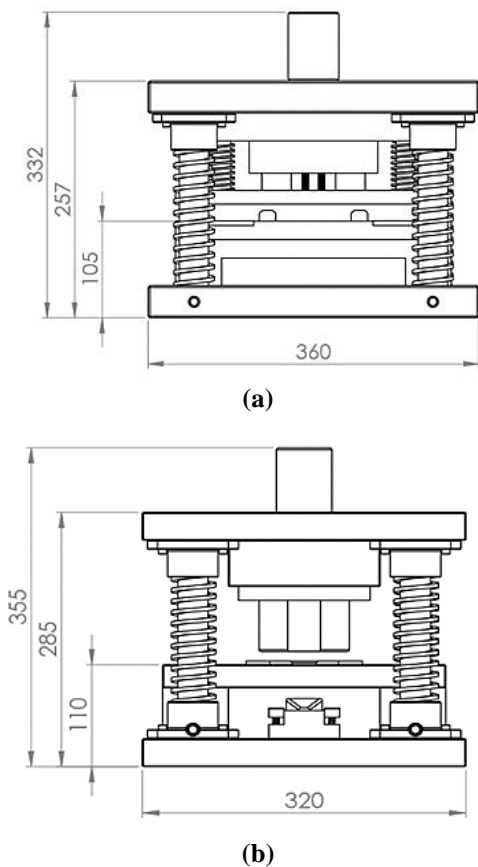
Press tool (a) depicts the details of the press tool blanking and (b) bending design
